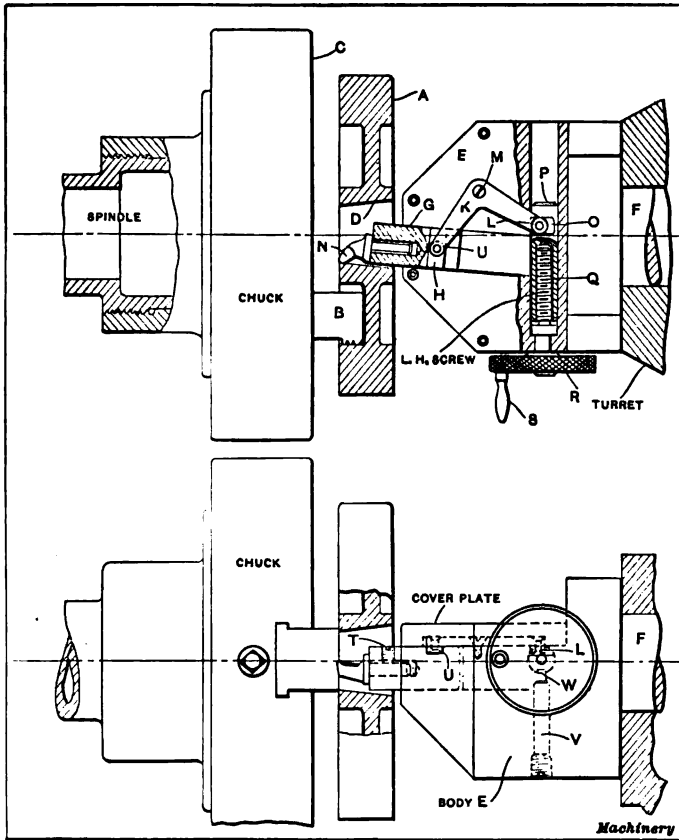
Attachment for generating Small Taper Hole in a Motor-cycle Flywheel
